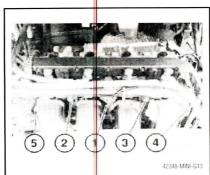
Showing intake manifold bolt tightening sequence—Cooper Coupe
